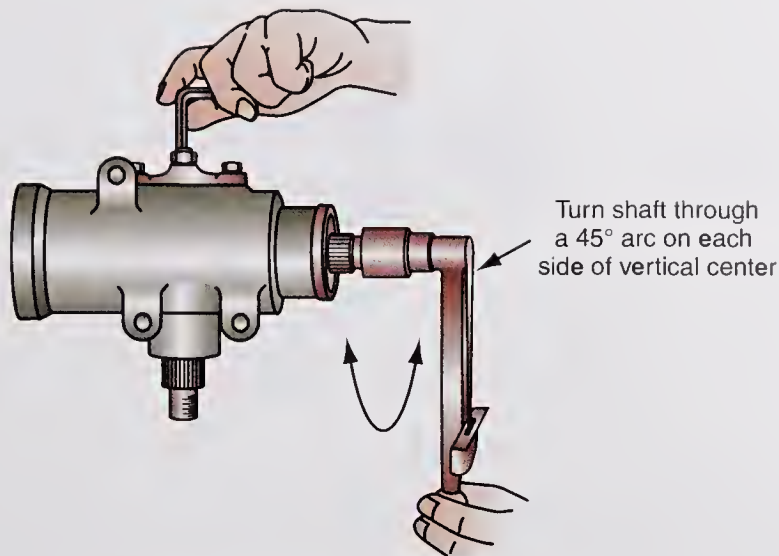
Measuring wormshaft turning torque to adjust pitman backlash adjuster screw.
